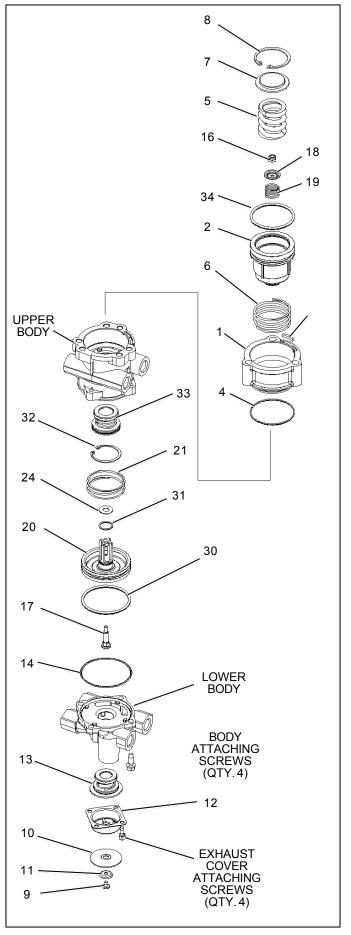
E-10P BRAKE VALVE - EXPLODED VIEW
